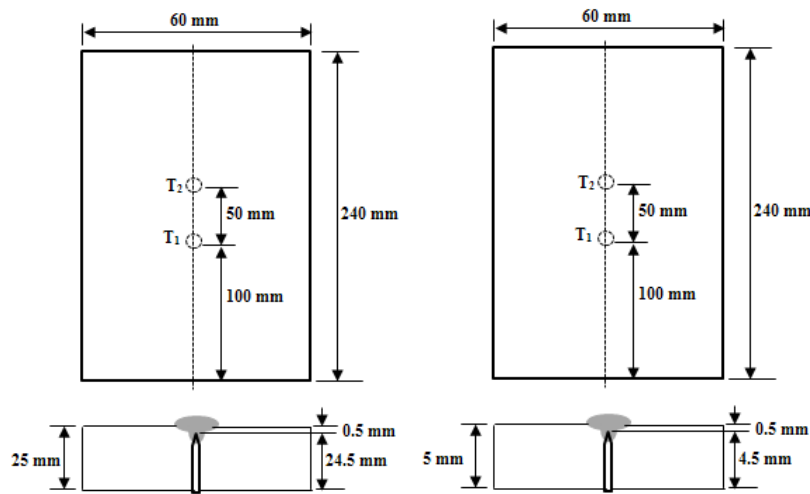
Arrangement of the R-type thermocouples inside the test piece (Left) 25 mm and (right) 5 mm plate.
